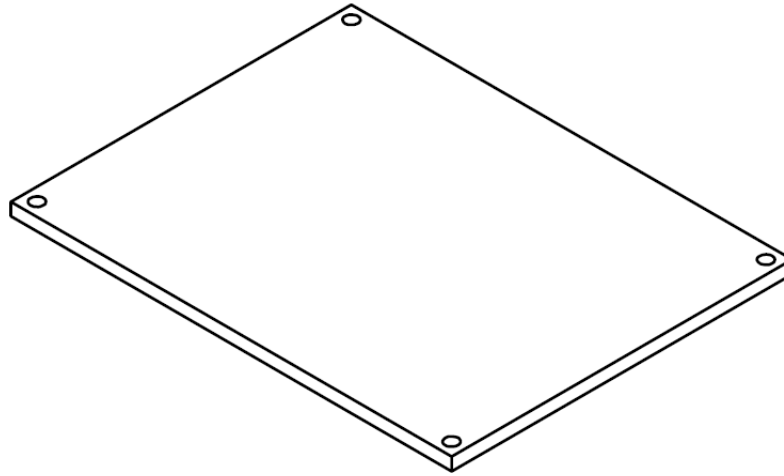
The bead die for our final design. All dimensions are in mm with a tolerance of 0.1 mm unless other specified.
